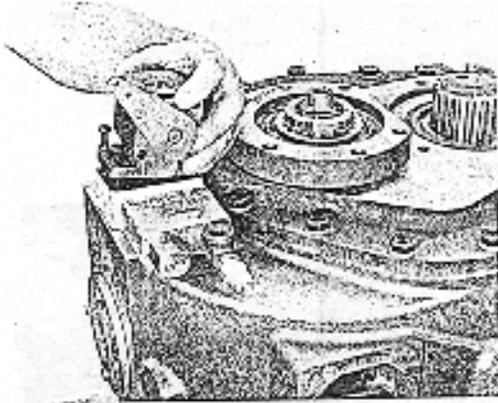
Locating Selector Valve Gasket and Selector Valve.
